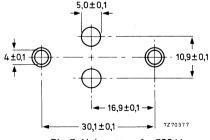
Hole pattern for 500 V insulation, nut fastening.
